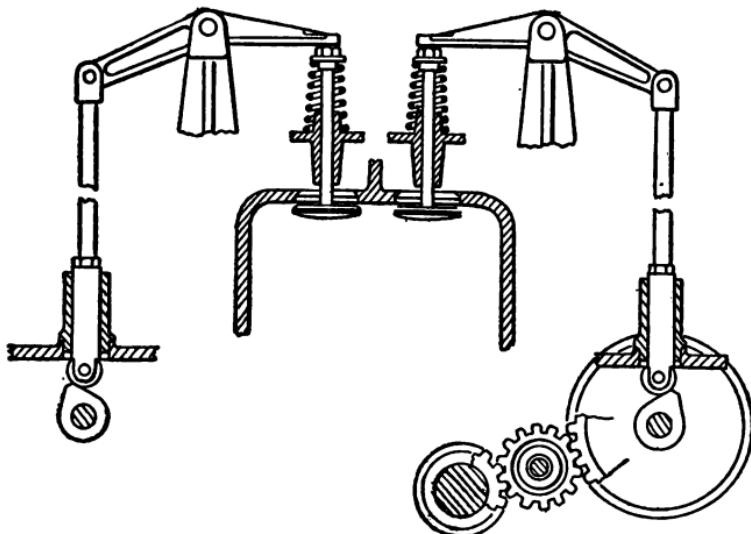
Overhead valve lift mechanism. The cams actuate push-rods, which act on the valves through the bell cranks or "walking beams."
